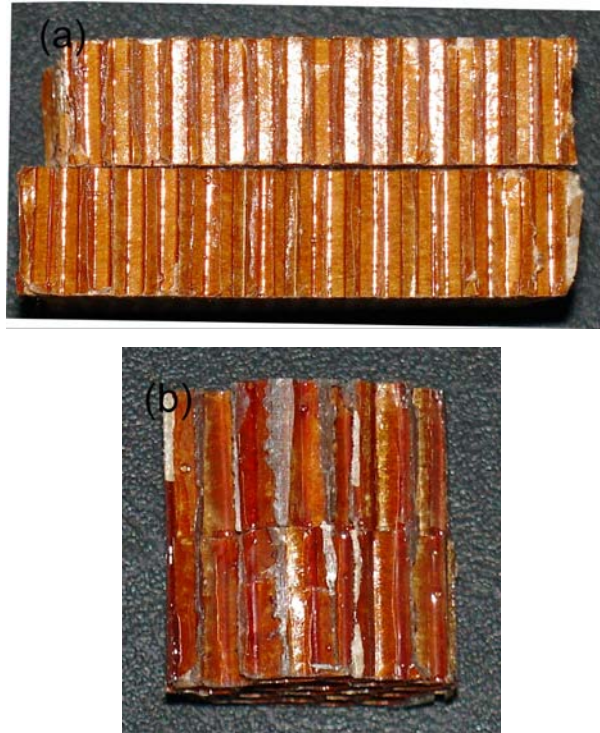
(a) Double layer honeycomb and (b) circular double layer honeycomb after drilling
